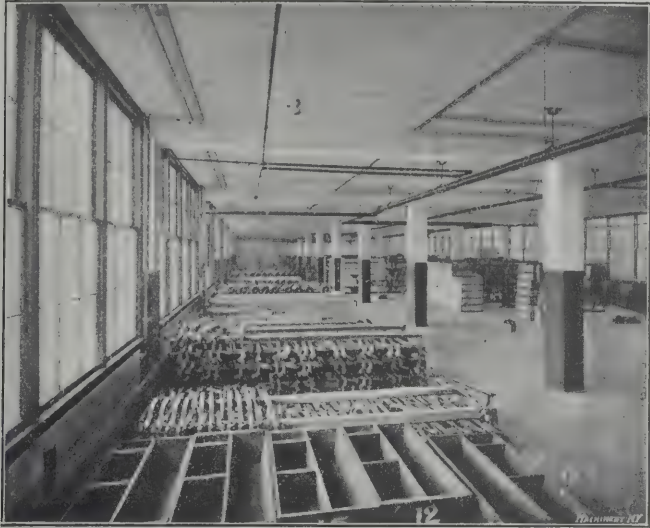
View of Stock Room, showing Trucks in which Parts are taken to the Assembling Room, Assembled Parts, and Bins in which Smaller Parts are Stored
